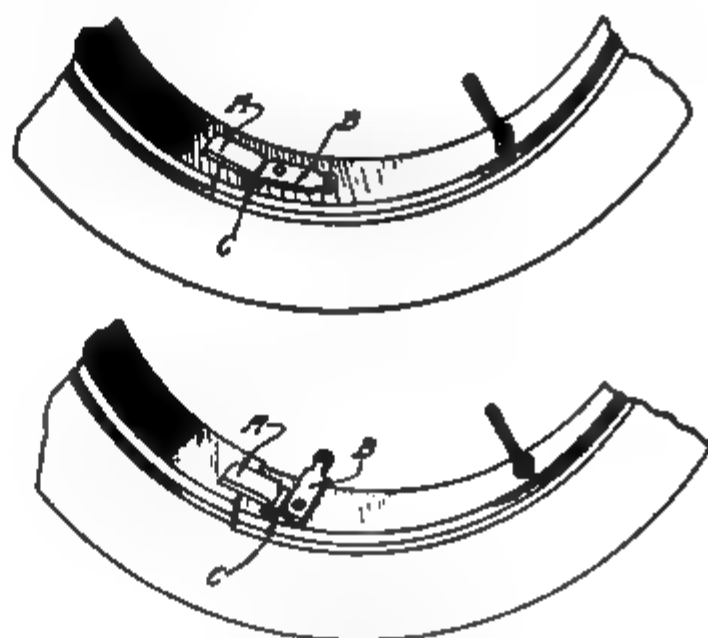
One-Piece Rim, Showing Right-Angled Split and Locking Device
